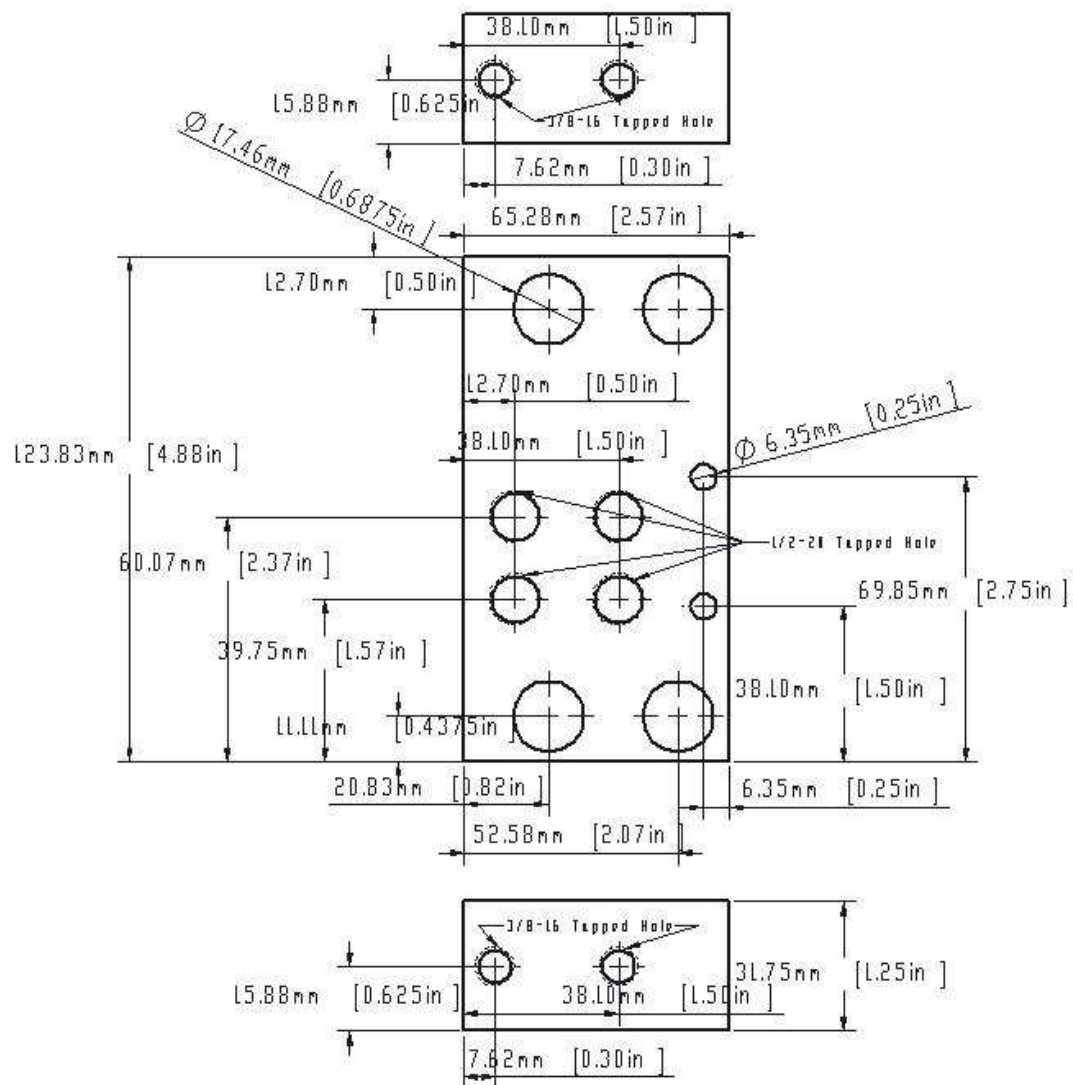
Drawings of the side pieces for the Combined Loading fixture (4 required)
